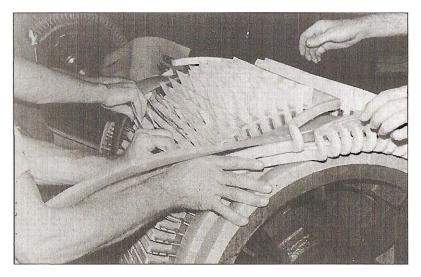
The installation of preformed rotor coils on a dc machine rotor. (*Courtesy of Westinghouse Electric Company.*)
